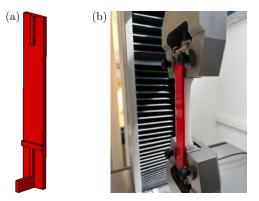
(a) Device for orienting specimens between trays; (b) test specimen attached to the test machine using the device.
